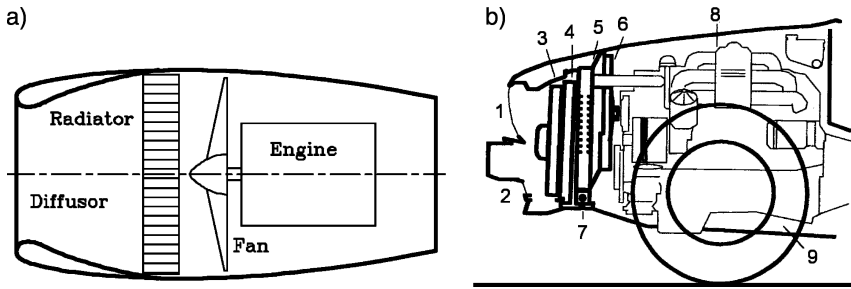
(a) Ideal radiator. (b) Actual layout of the cooling system in the engine compartment. 1) upper air intake; 2) lower air intake; 3) auxiliary fan; 4) air conditioning radiator; 5) radiator; 6) fan; 7) oil radiator; 8) engine; 9) air outlet.
